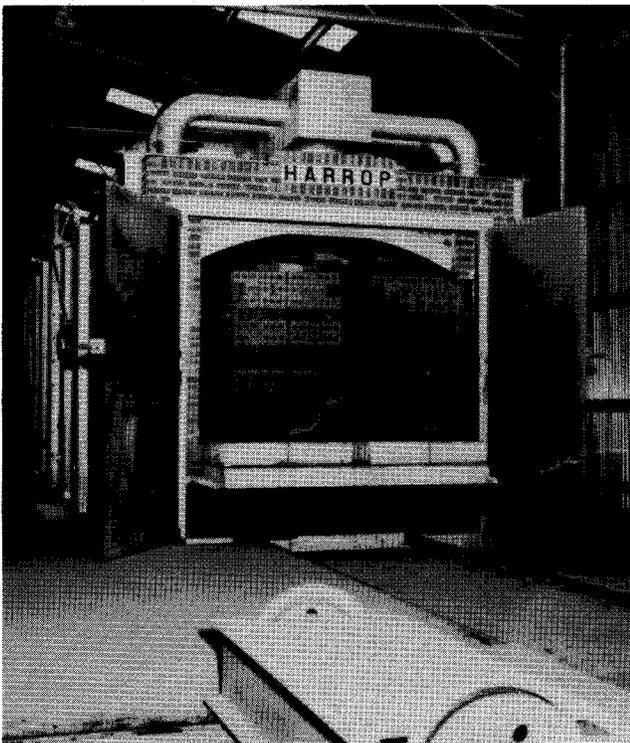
Fired bricks emerging from a tunnel kiln, Old Virginia Brick Co., Inc., Salem
